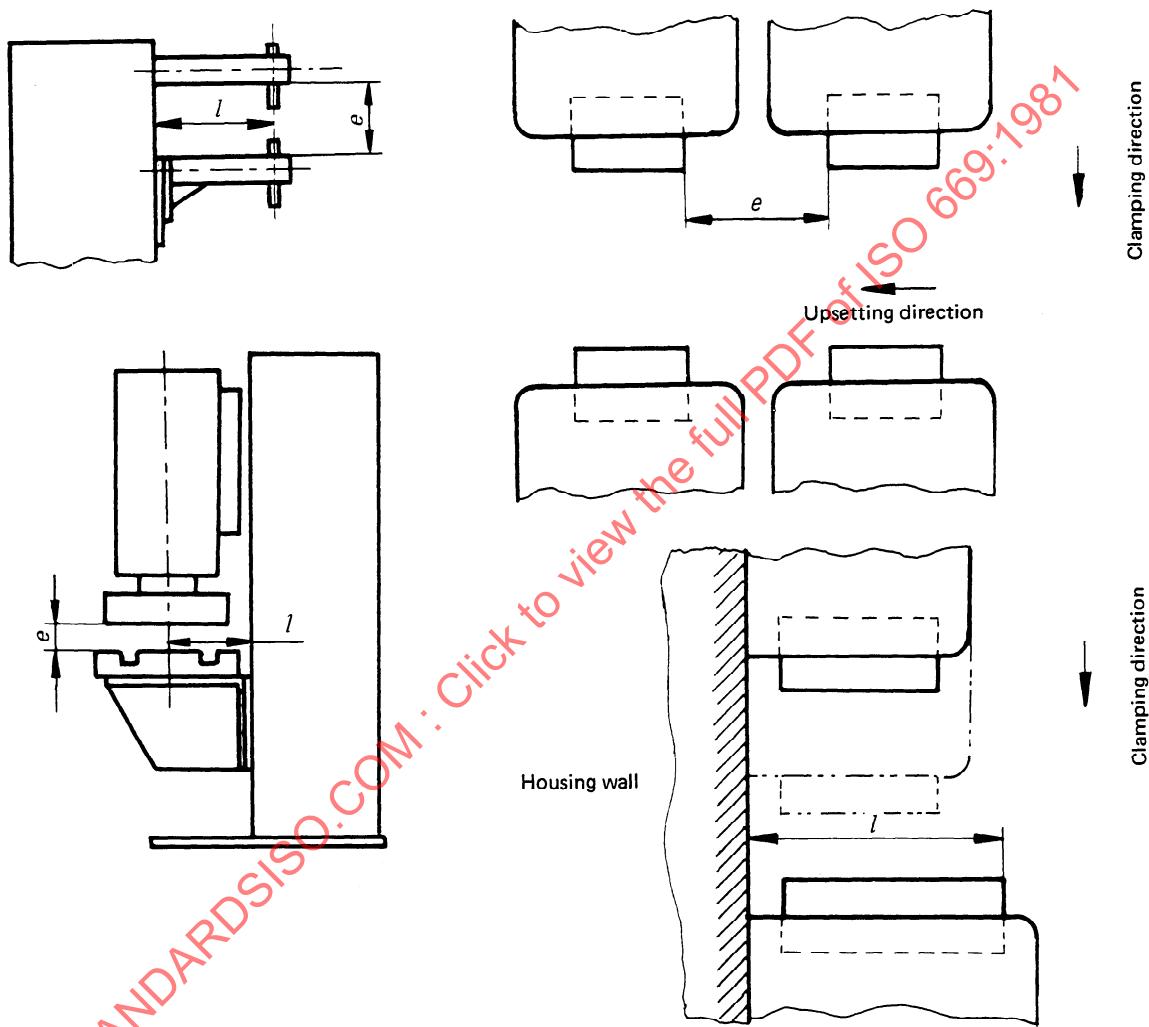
Geometrical characteristics of resistance welding equipment
